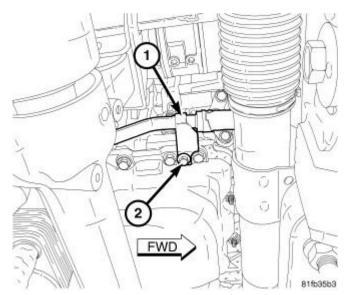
Oil Cooler Line & Bolt Courtesy of CHRYSLER LLC
